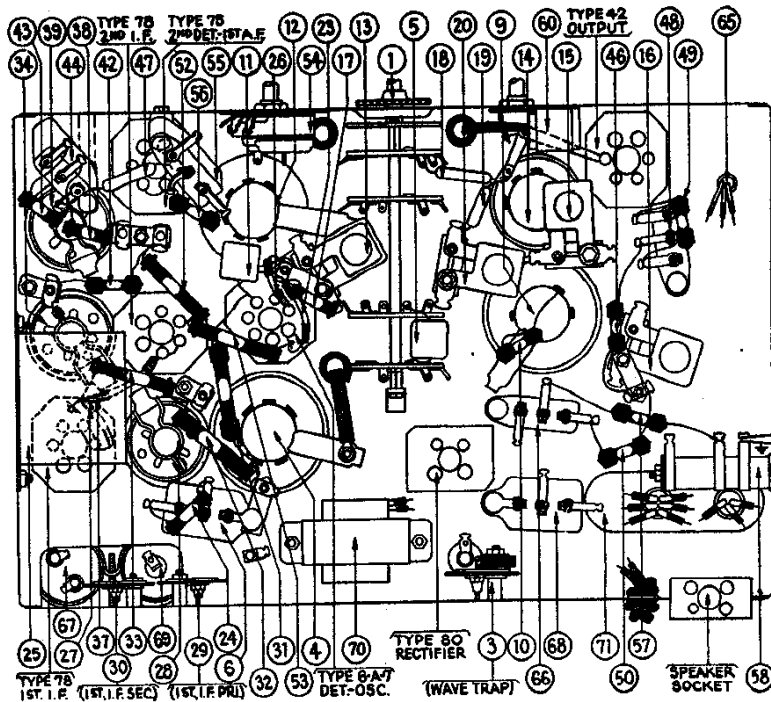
Bottom View of Chassis, Showing Parts, and Position of Compensating Condensers Located,—and Reached,—from Below Chassis.
